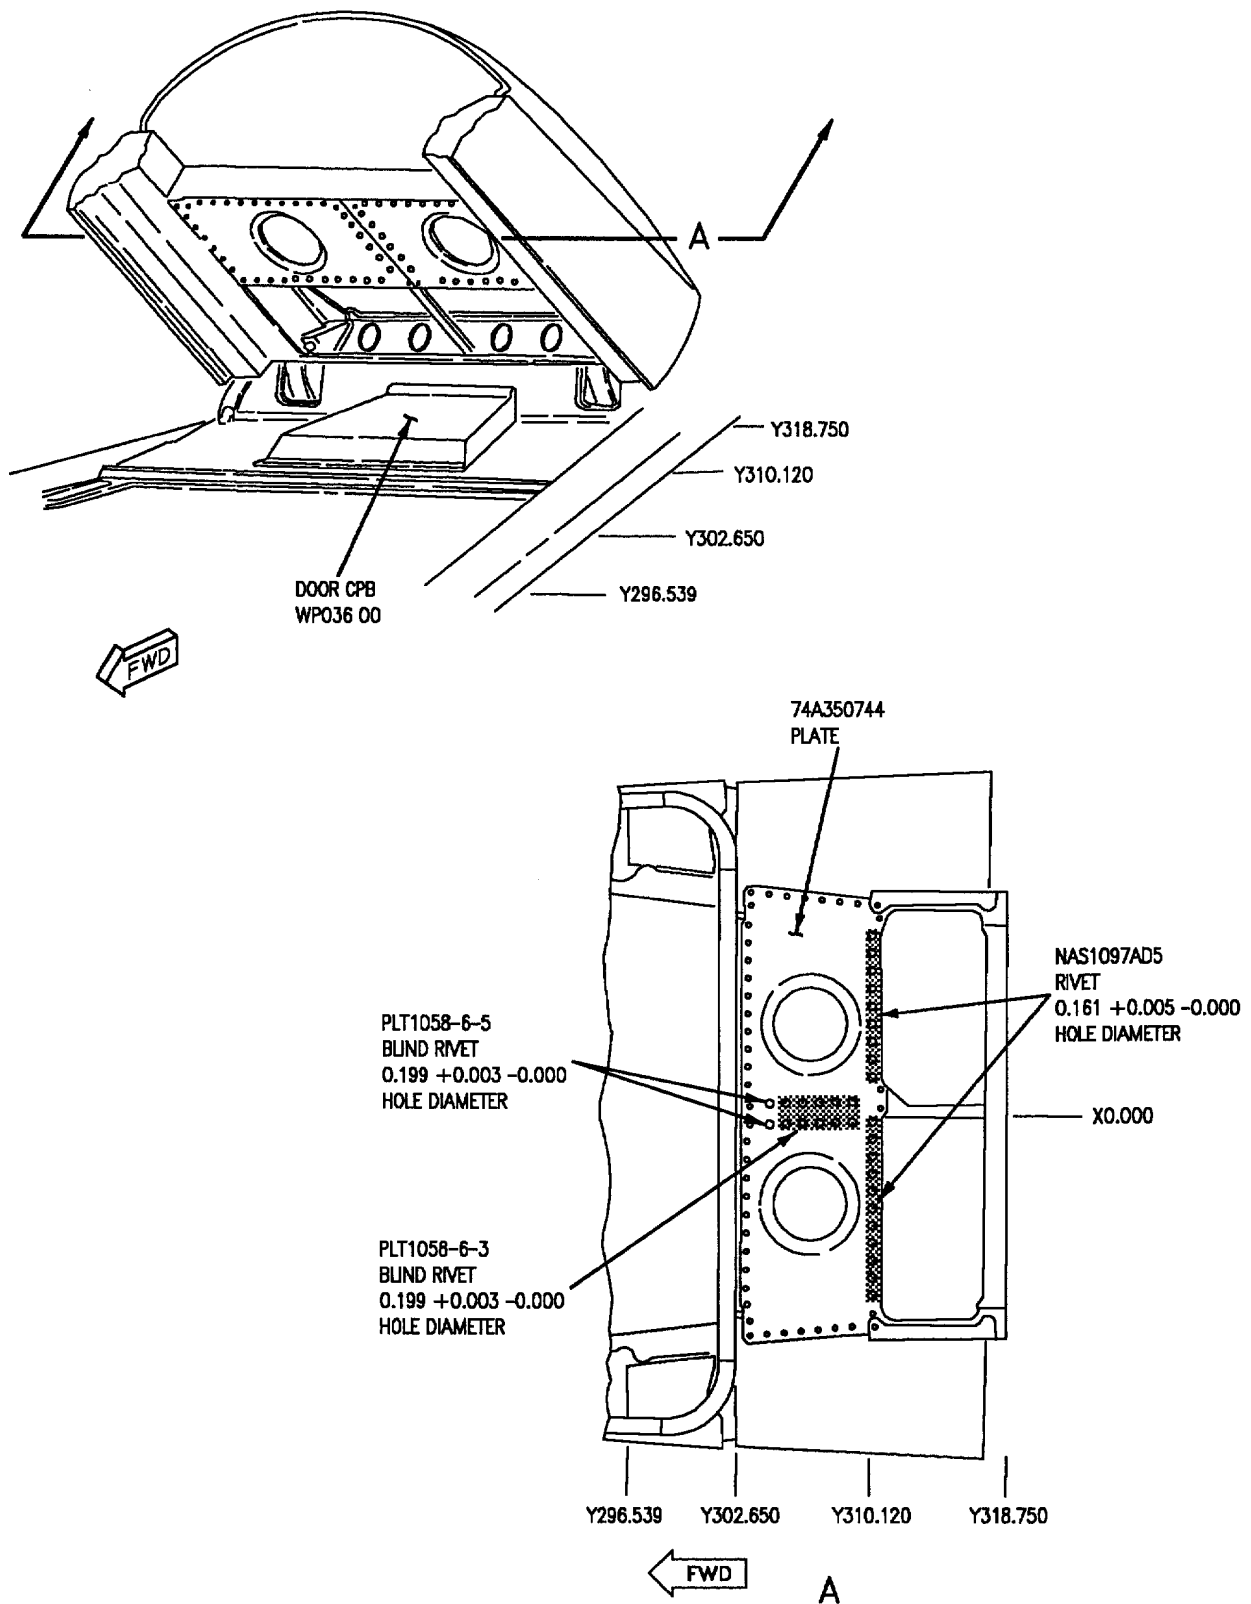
Chafing Repair for 74A350744 Plate Fasteners
